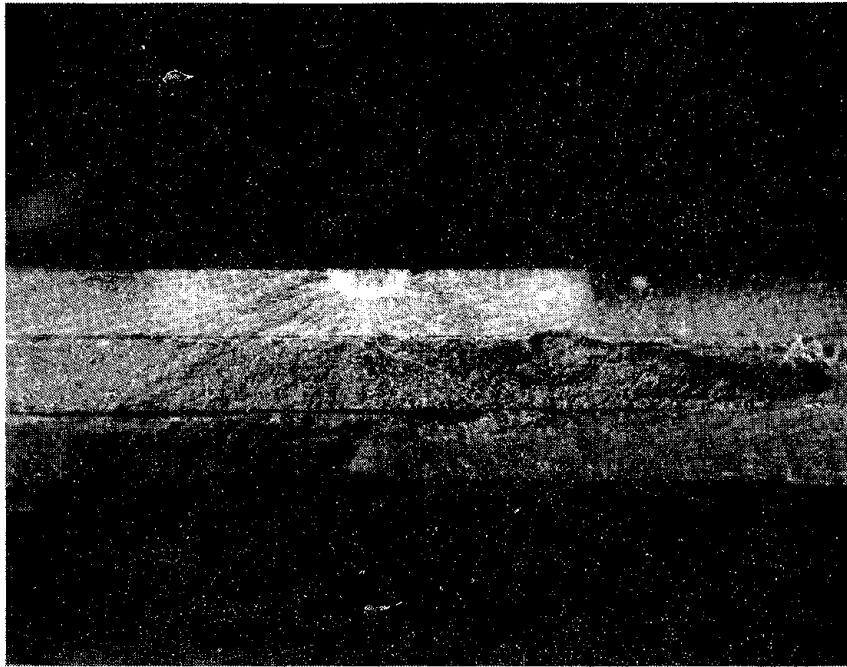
Fracture Surface of Specimen No. 353492-8A - Nine Times
